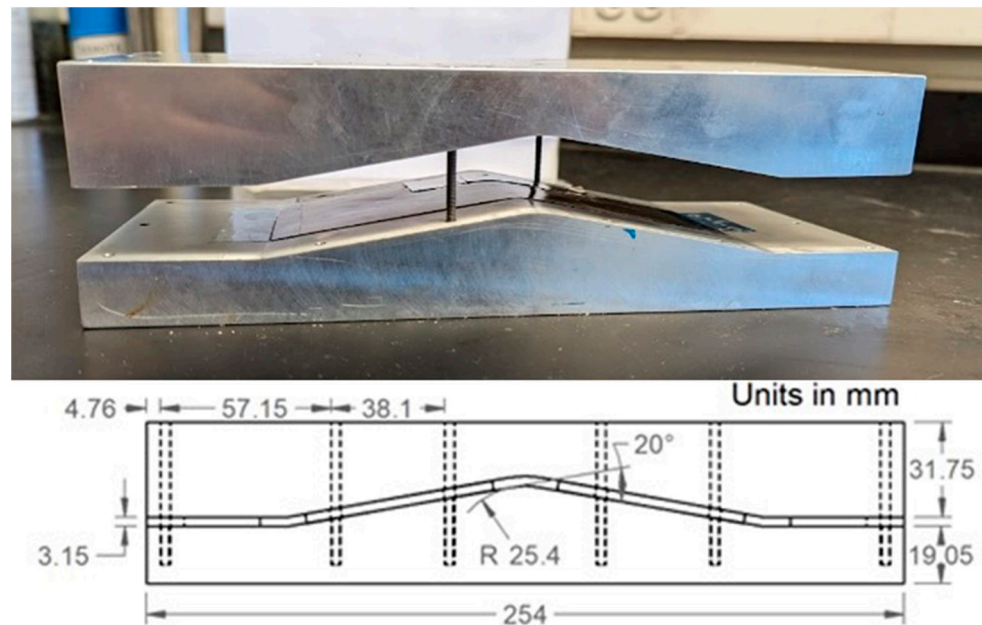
Tool used for bending of vitrimer parts. (Top) A picture of the tool. (Bottom) Schematic.
